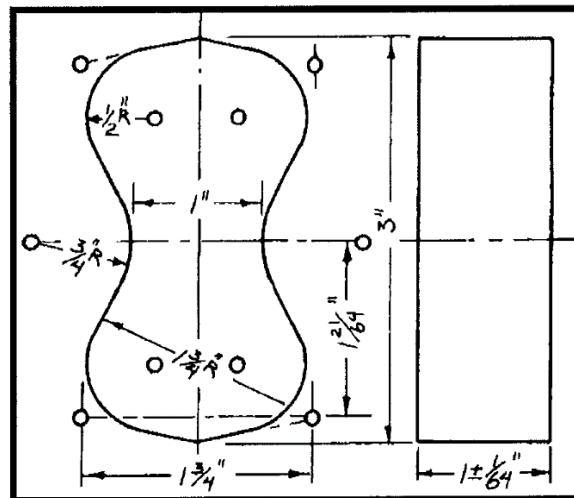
AFS Standard Tensile Specimen AFS 3342-00-S [11]
